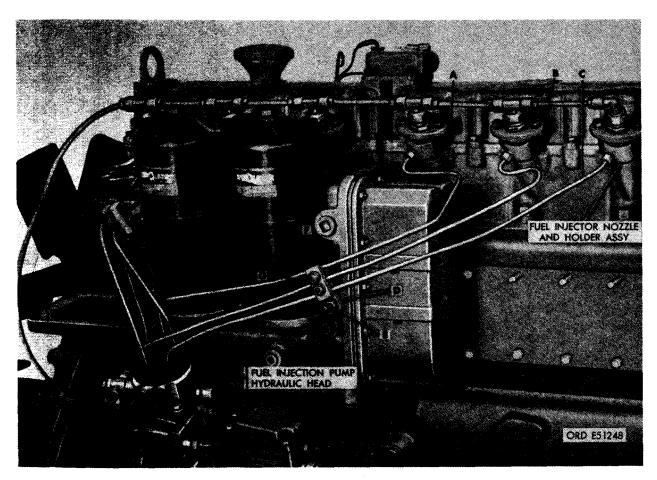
CONNECTING CYLINDER NO. 4, 5, AND 6 FUEL INJECTION TUBES (EARLY MODEL ENGINES).
